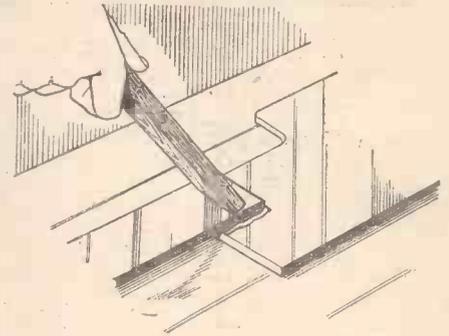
Use a piece of stick to hold the soldered pieces together until the solder has set.
